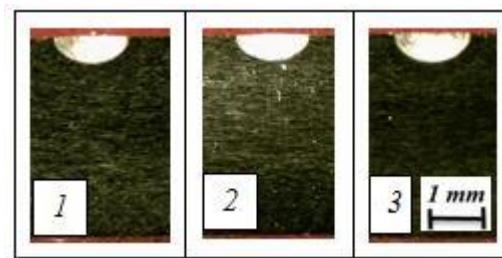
Cross sections (thickness $t=3$ mm) of the lone laser welding at the power $P_L=2000$ W for different values of the welding speed: 1) $S= 1000$ mm/min, 2) $S= 800$ mm/min and 3) $S= 500$ mm/min.
